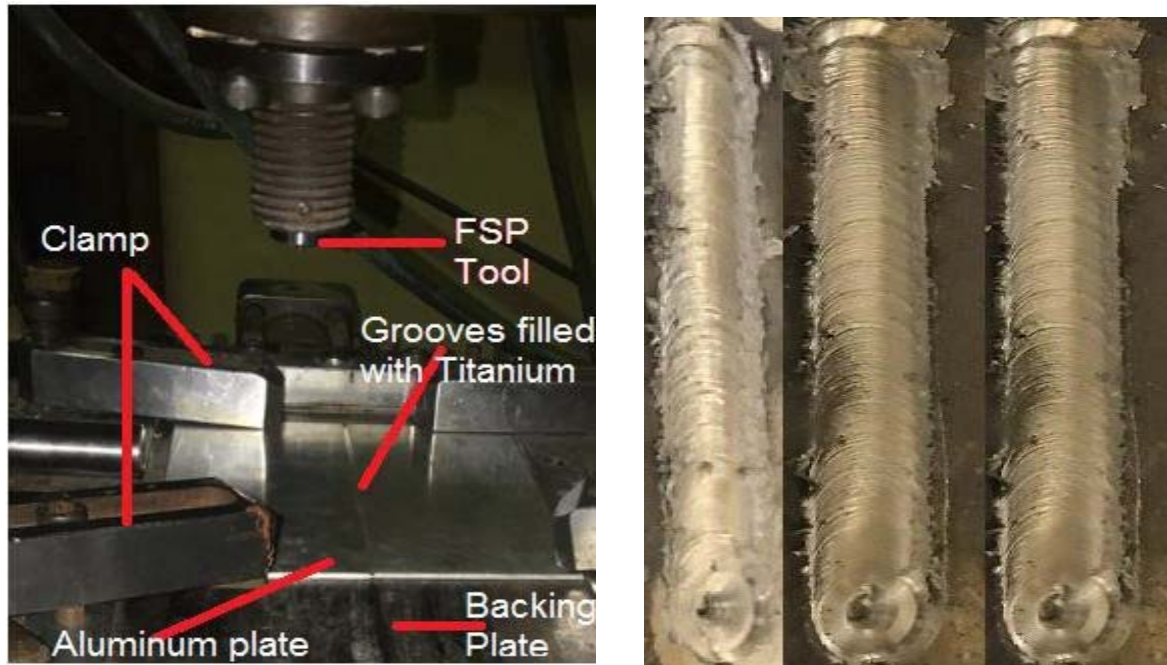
(a) 5-axis FSW machine which is developed for FSP. (b) Crown appearance of the samples
